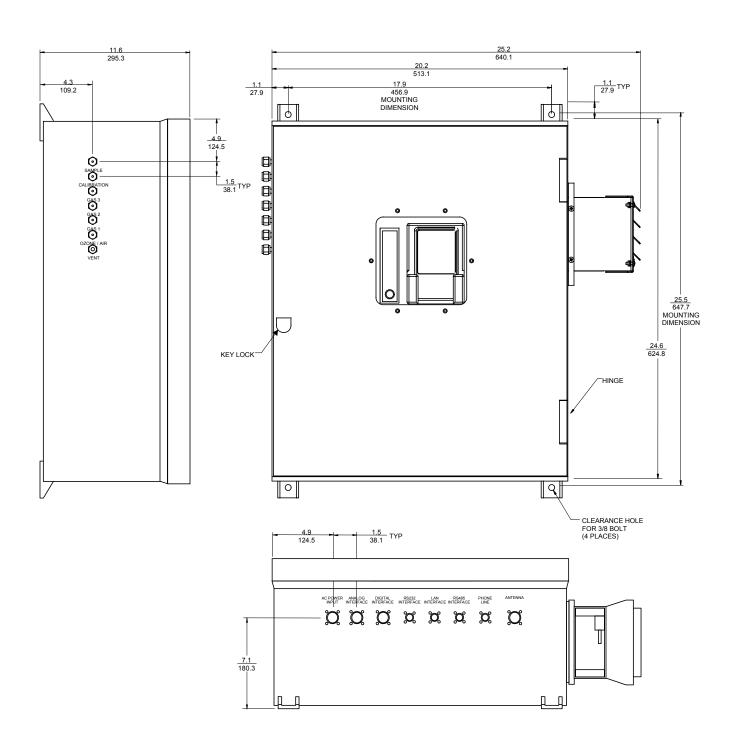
MicroCEM Outline and Mounting Dimensions
